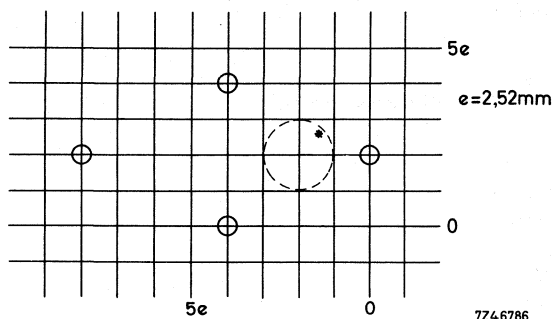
Hole pattern for mounting on a printed-wiring board;  $e = 2,54$  mm.
